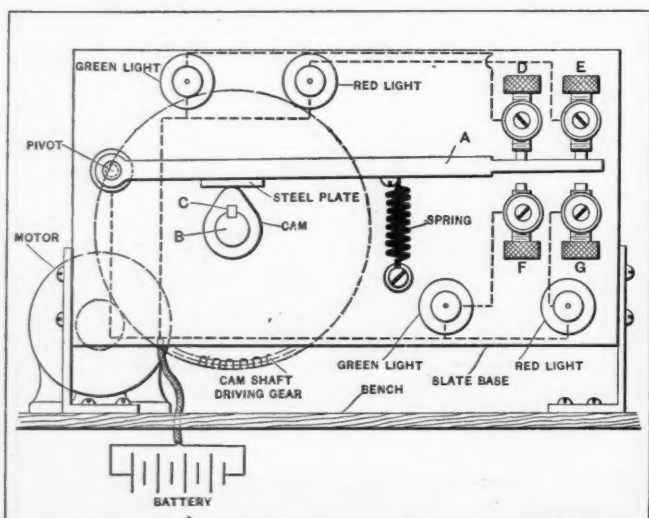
Electrical Device for inspecting Gas Engine Cams of Detachable Type
